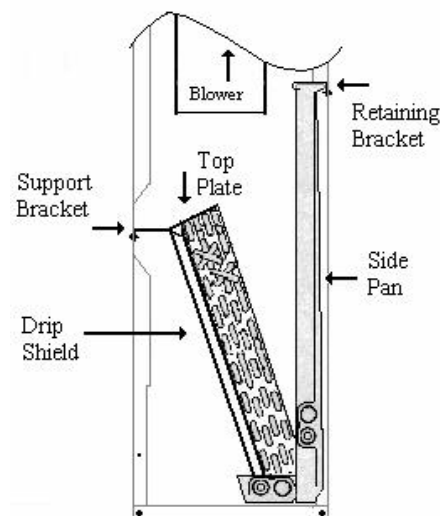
Drawing of Air Handler BVRMB7230S001 model in vertical position ready for Left-to-Right airflow if desired.
